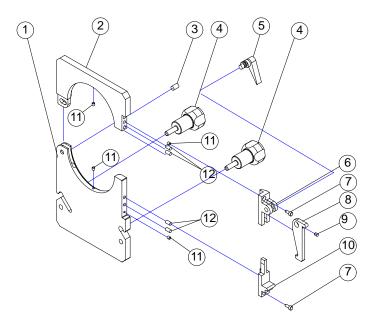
SWS-20FSP1R Special Purpose Fixture Block
